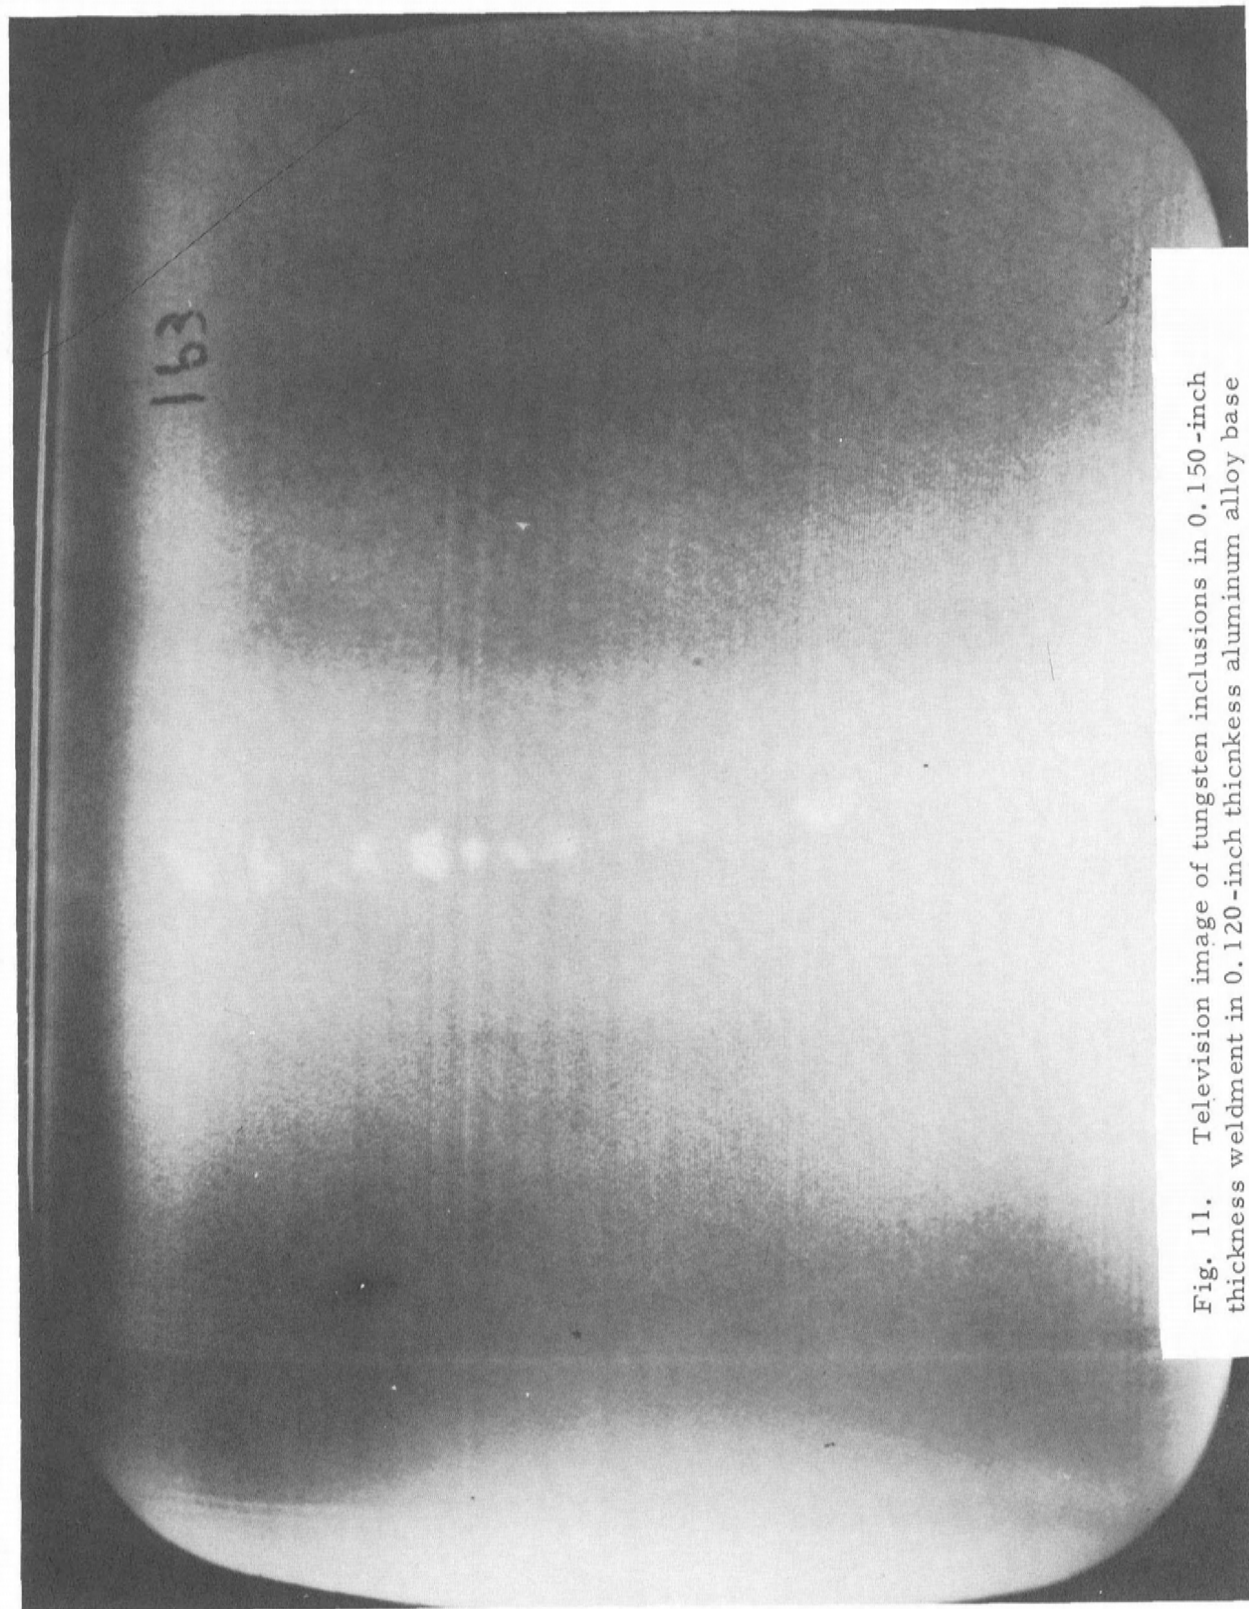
Television image of tungsten inclusions in 0.150-inch thickness weldment in 0.120-inch thickness aluminum alloy base material (reproduced from 16-mm. motion picture of monitor image of moving specimen). Ohio State University X-Ray Image System.
